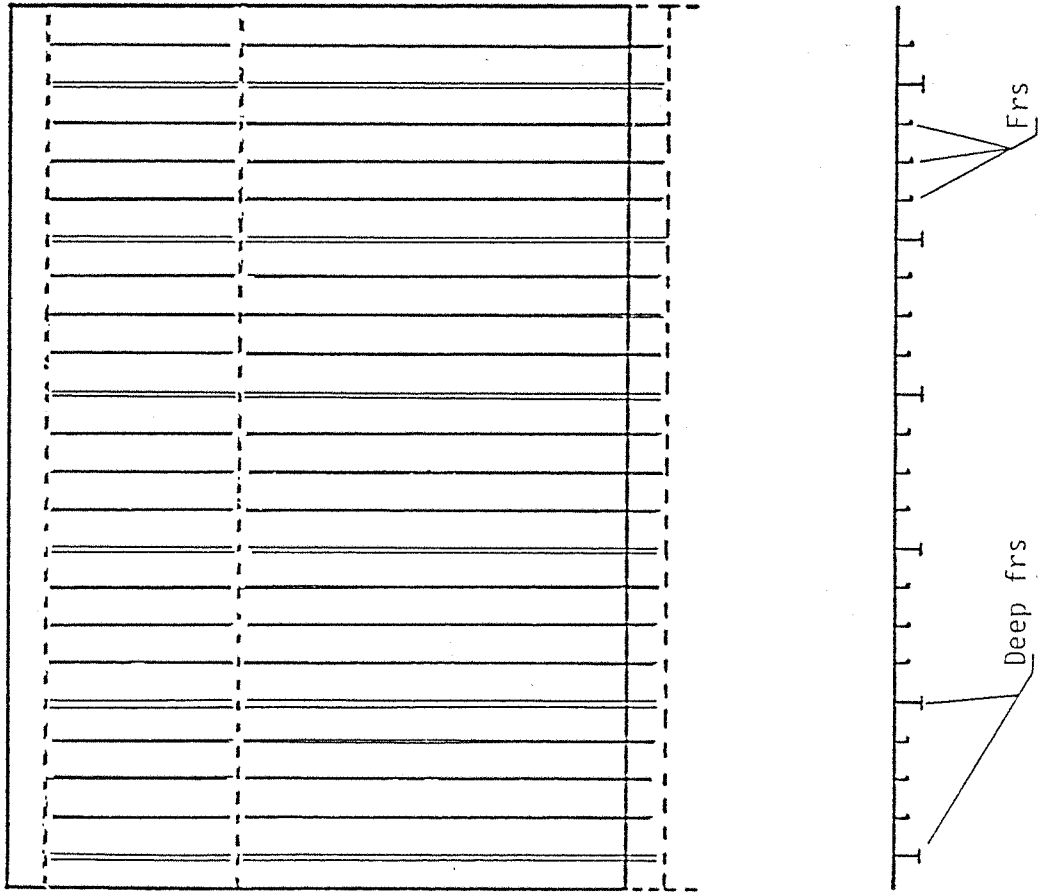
SCANTLINGS ARRANGEMENT OF DECK
